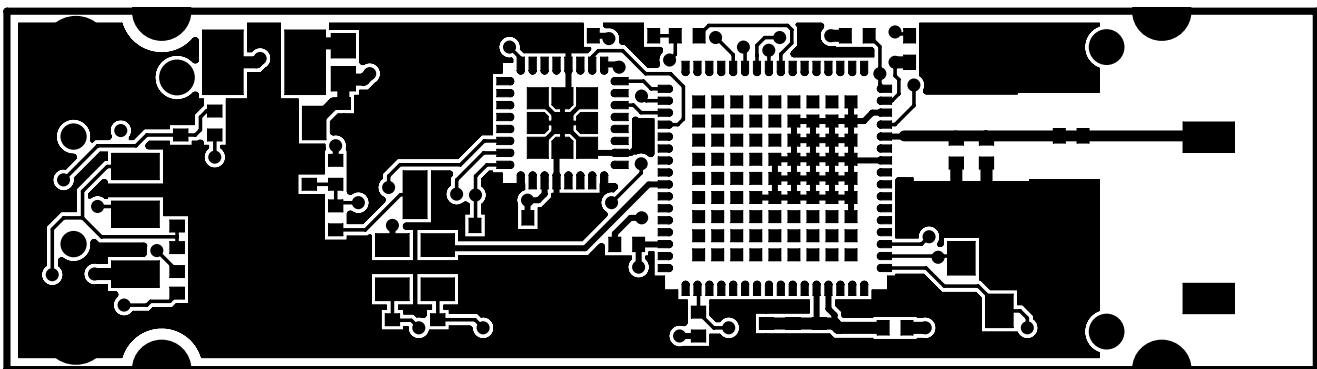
1322x USB Dongle PCB Layout (Top View)
